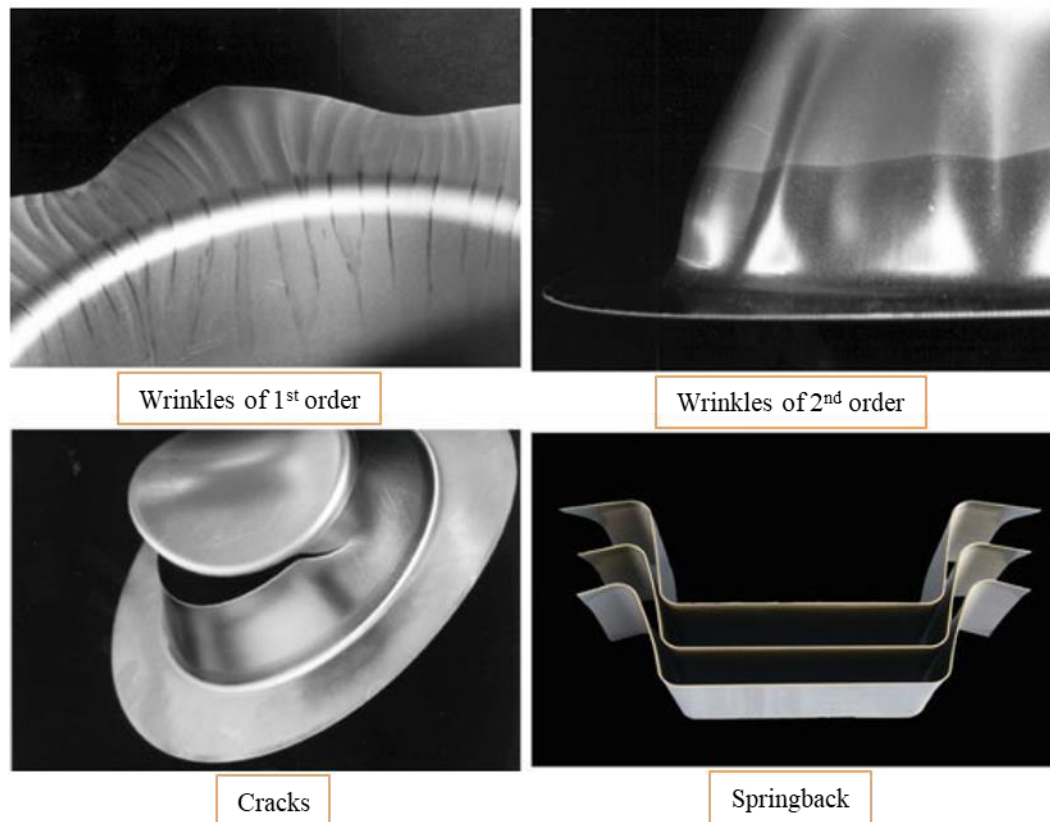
The most common types of failure related to deep drawing [84]
